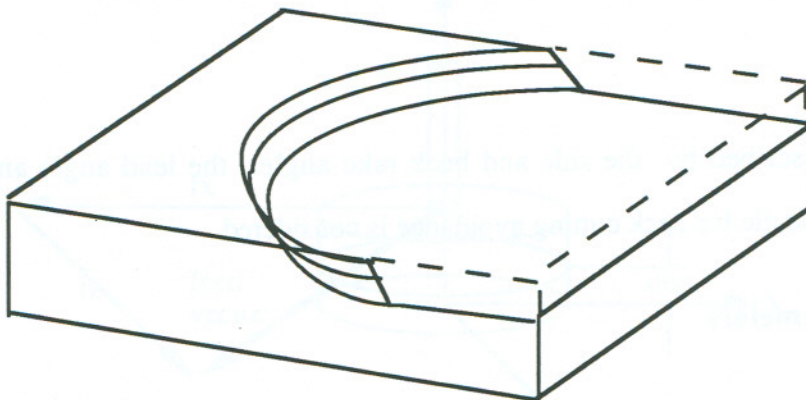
Actual workpiece as obtained from the cutter pass on the original workpiece.
